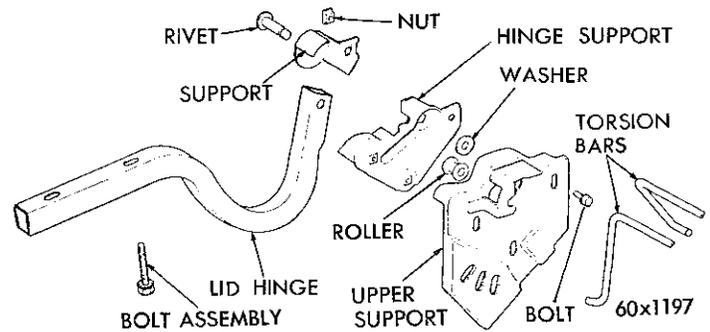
Torsion Bar and Deck Hinge Assembly (Exploded View)
